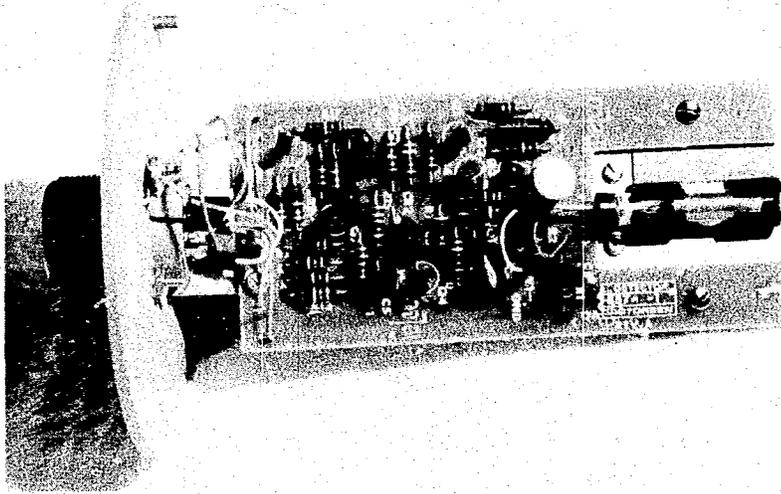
HP-R-213 DETECTOR P.C. BOARD COMPONENT SIDE
